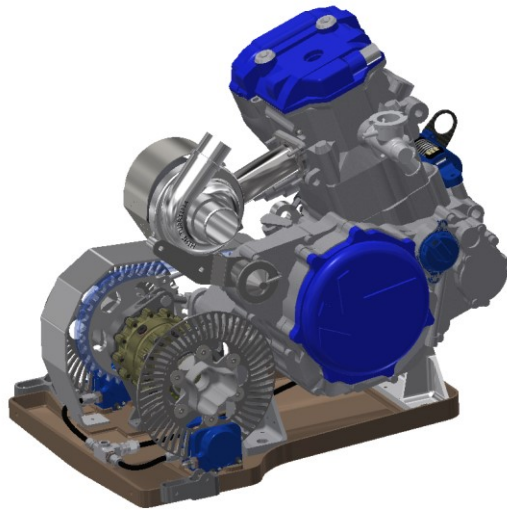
Engine and drivetrain mounted to the removable plate.
